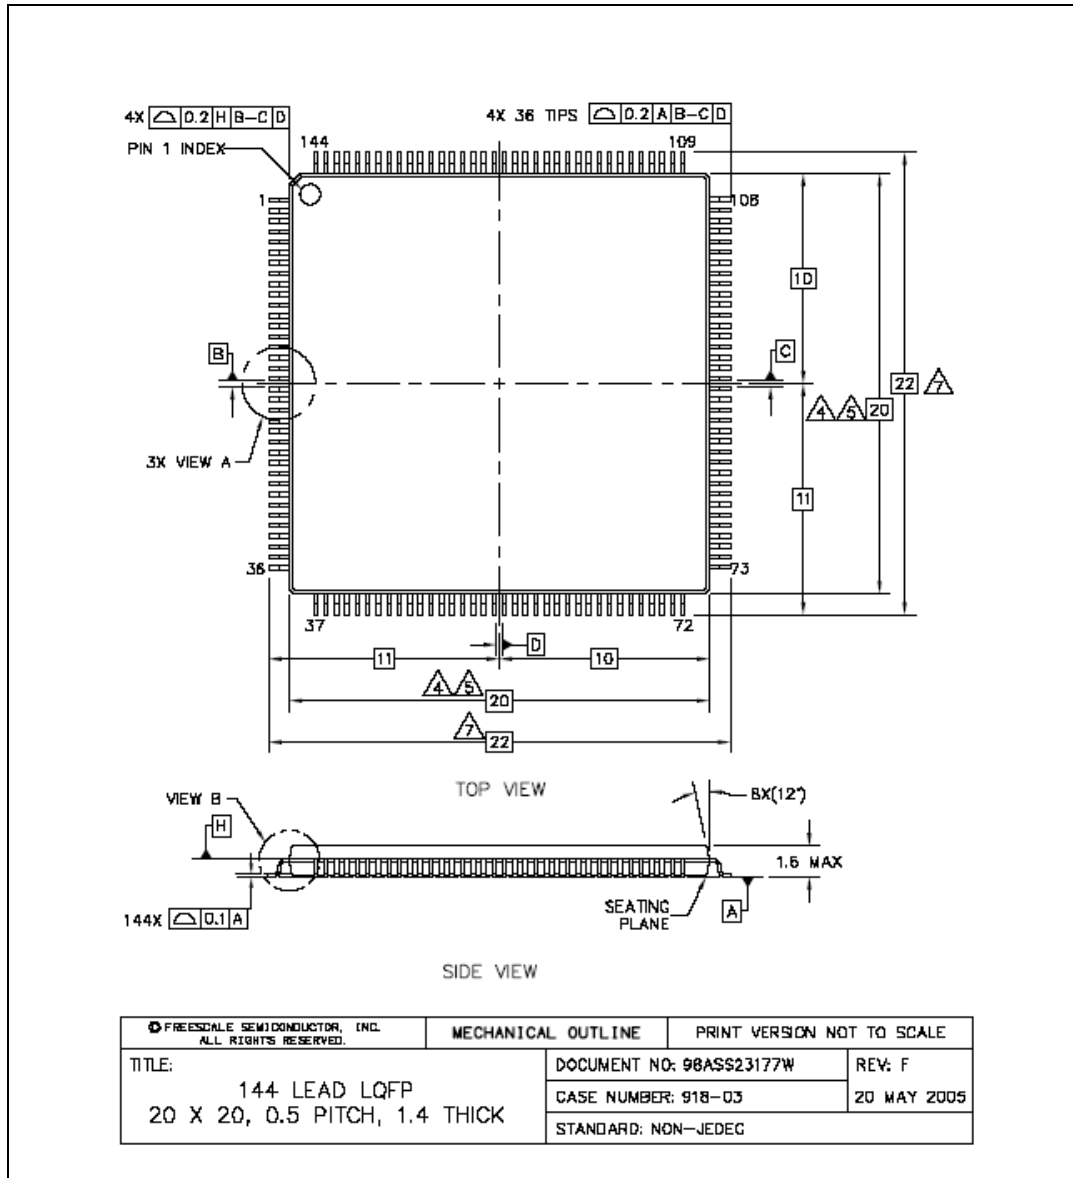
144 LQFP package mechanical drawing (1 of 2)
